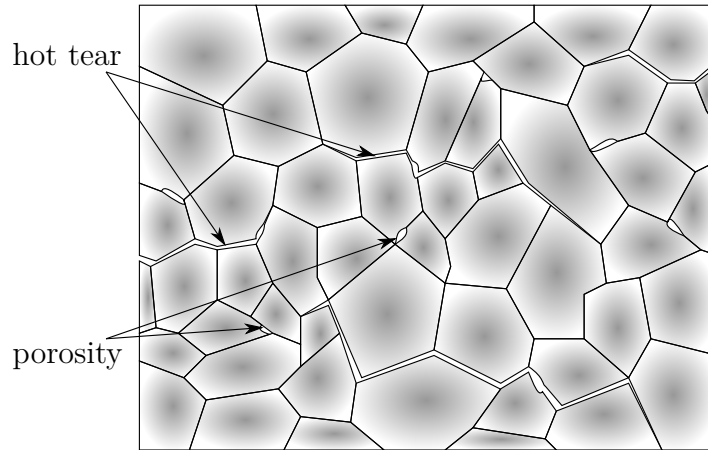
Illustration of cracks caused by hot tearing.
